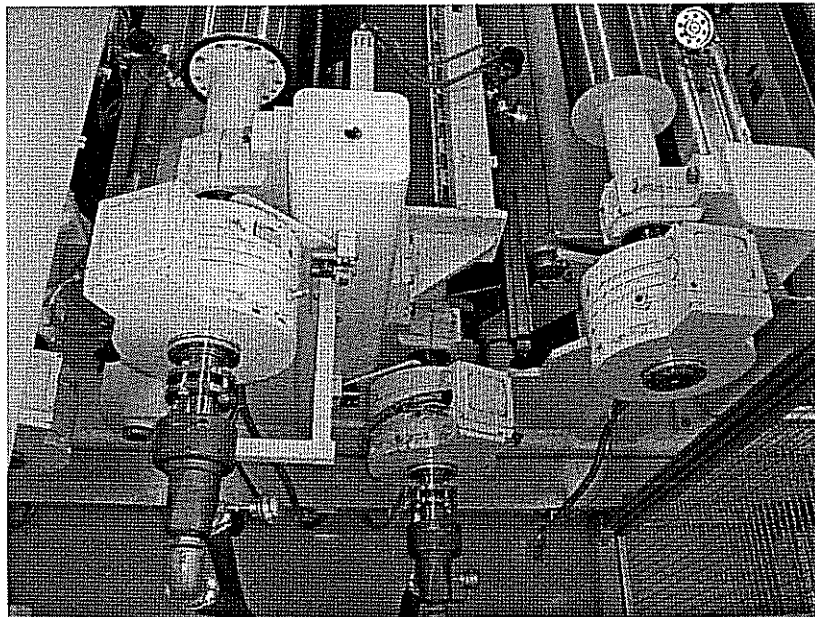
Pull roll assembly: two rolls with water cooling one without water cooling (right)
